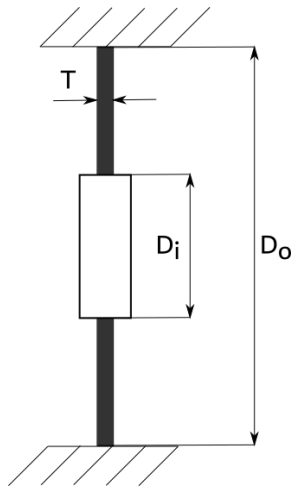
Schematic drawing of a single diaphragm to indicate the relevant dimensions
